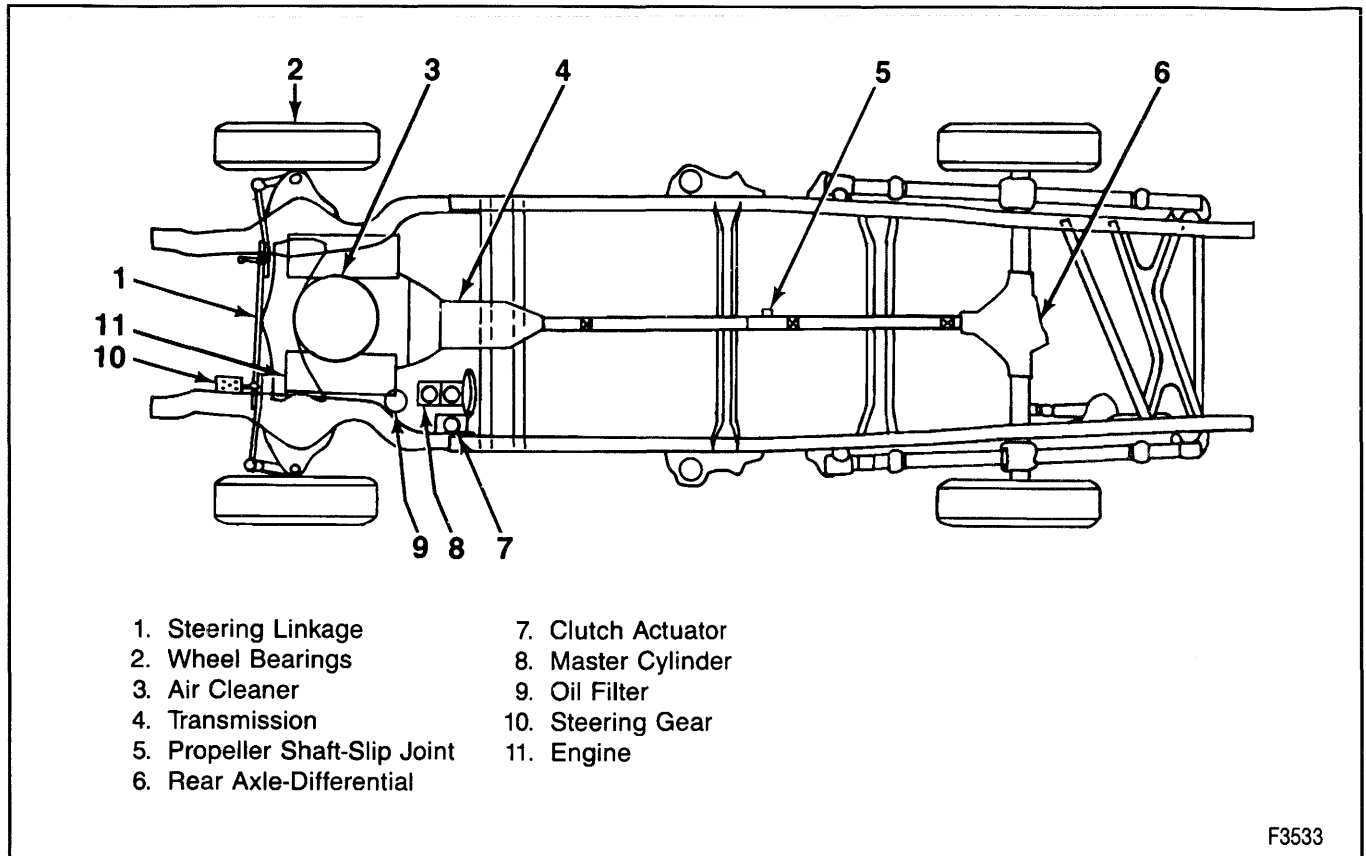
Lubrication Points (Two-Wheel Drive Models)
